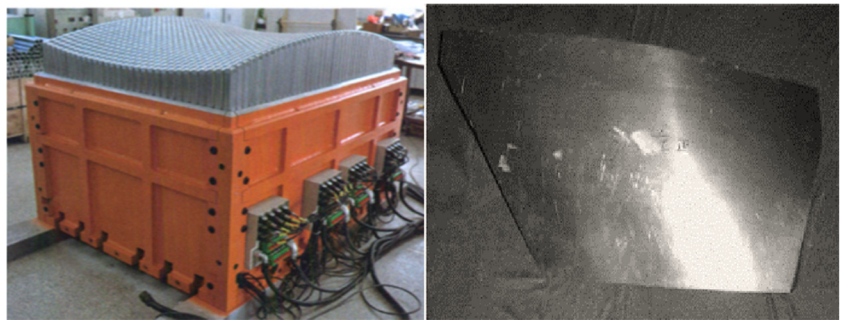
Multi-point forming for sheet metal and the part formed by MPF [20]
